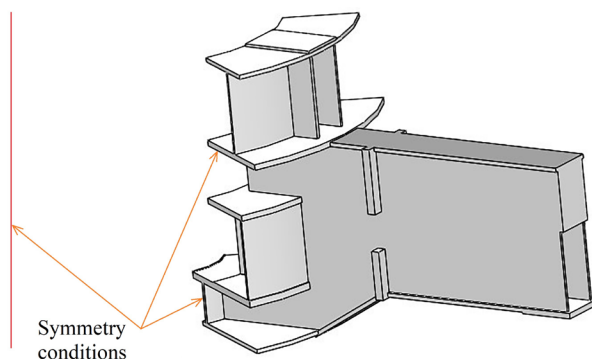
Three-dimensional model of the reconstructed upper crosshead
